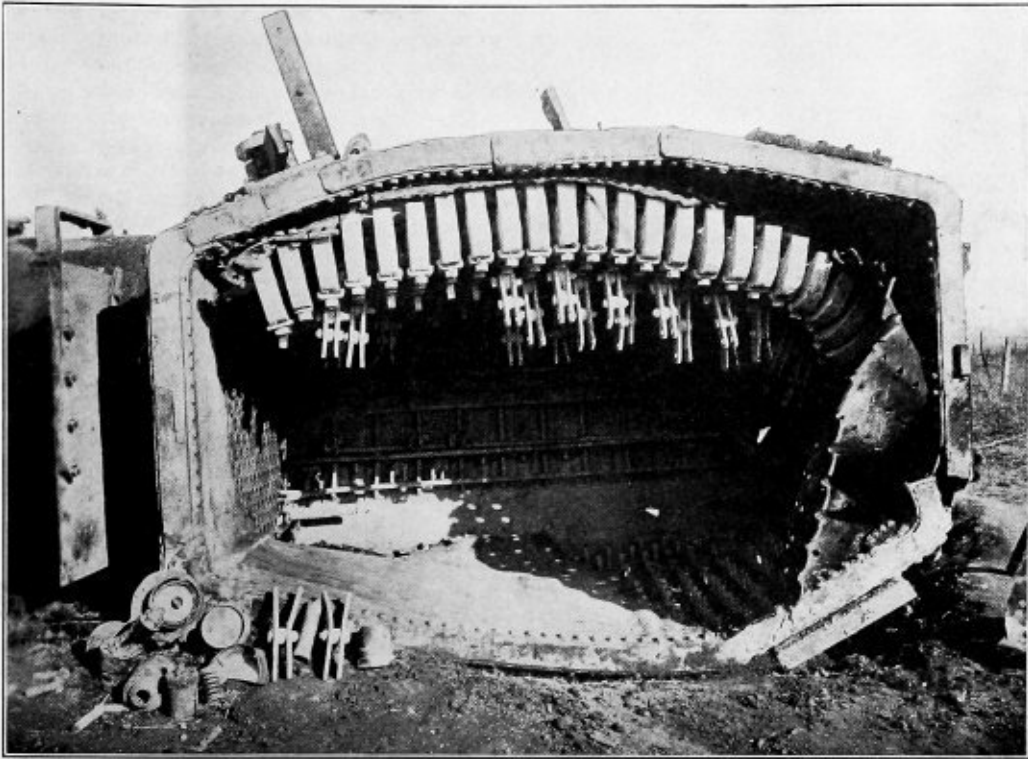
EXPLOSION CAUSED BY DEFECTIVE BRACING OF CROWN SHEET
